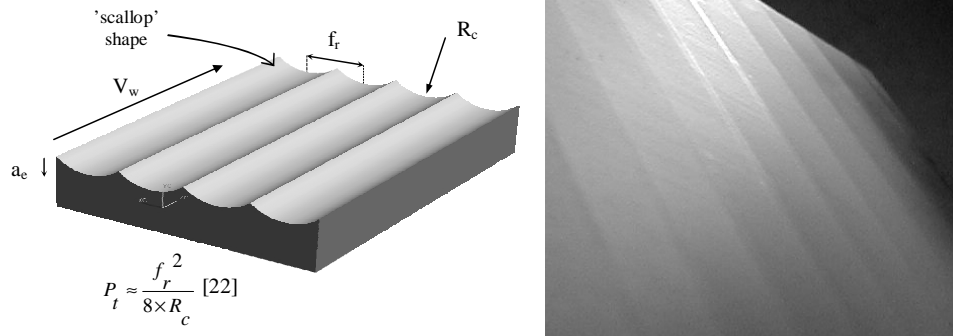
(a). Grinding mode, b) Semi finish surface (Zerodur[®])
